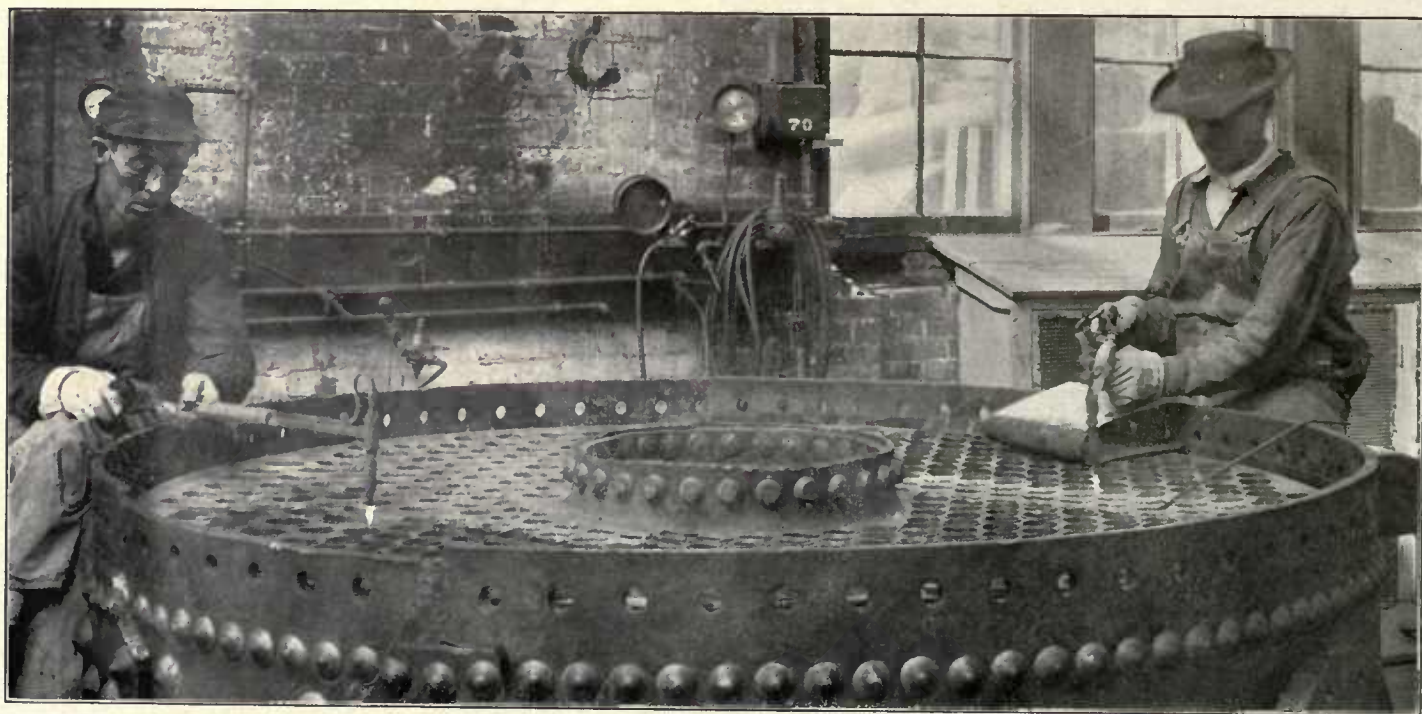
Welding Tubes in a Jacobs Superheater by the Oxy-Acetylene Process.
